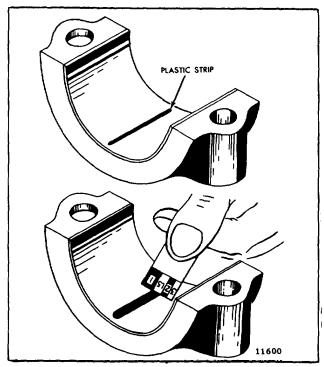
Using Plastic Strip to Measure Bearing-to-Crankshaft Clearance
